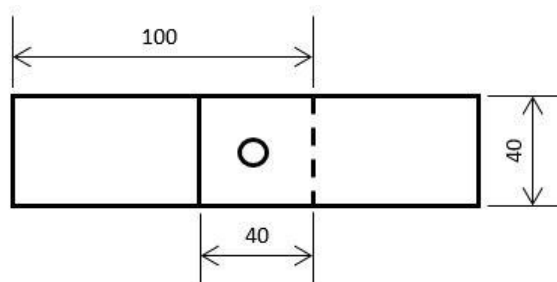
Welding sample installed as lapping joints for the shear-tensile test
